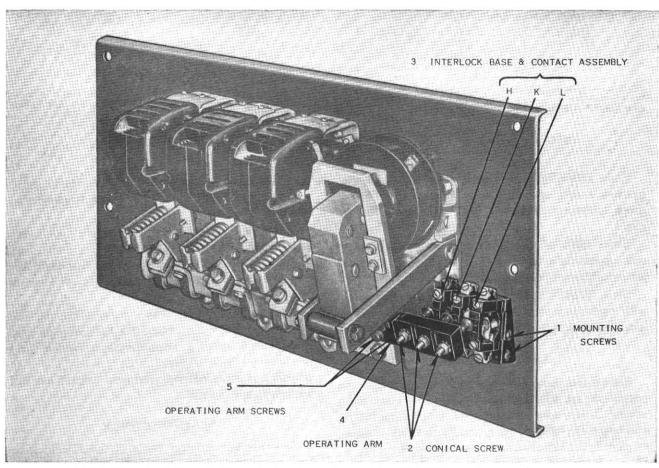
Type L-60 Electrical Interlocks Mounted on a Type GP-530 Rear Connected Contactor
